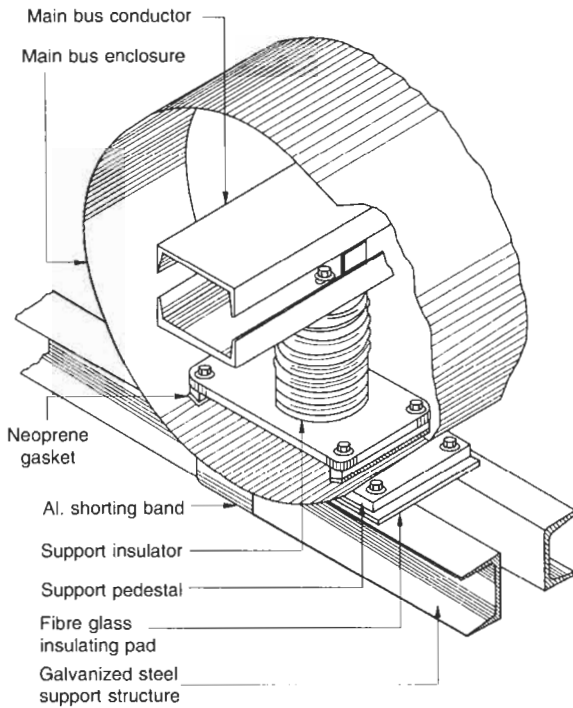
(b) Cross-sectional view of an IPB with insulated (discontinuous) enclosure illustrating busbar-supporting arrangement (Courtesy: Best & Crompton)
